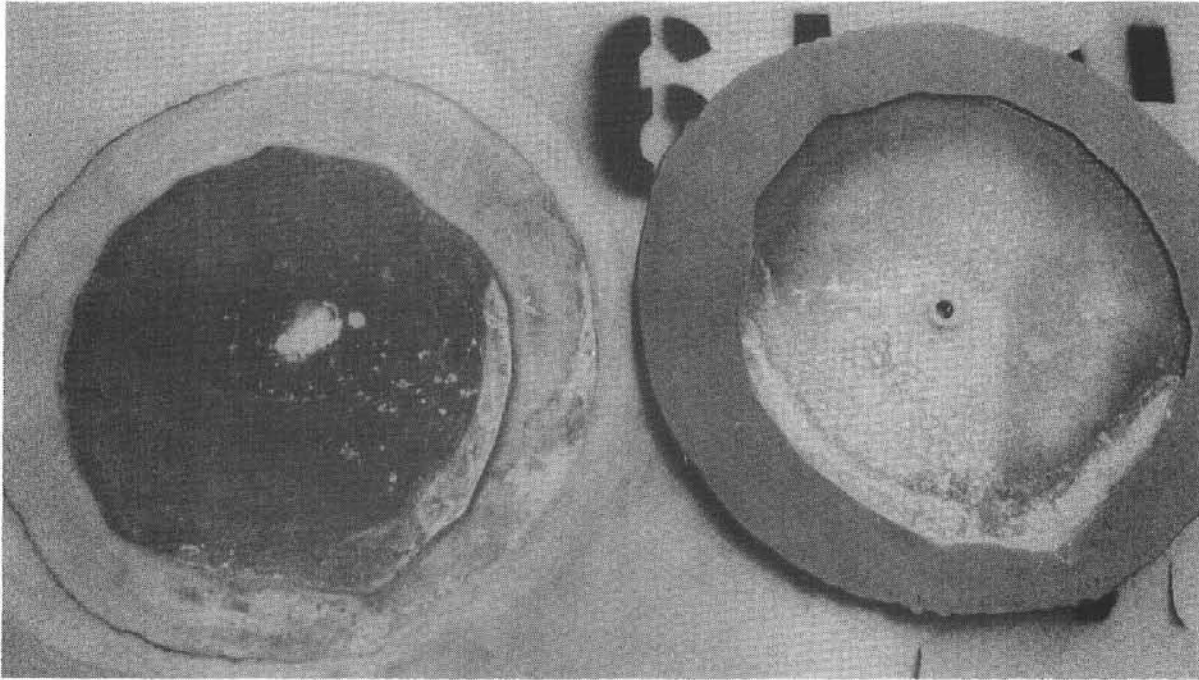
Debonded MDAC Mirror Module Mounting Cup
